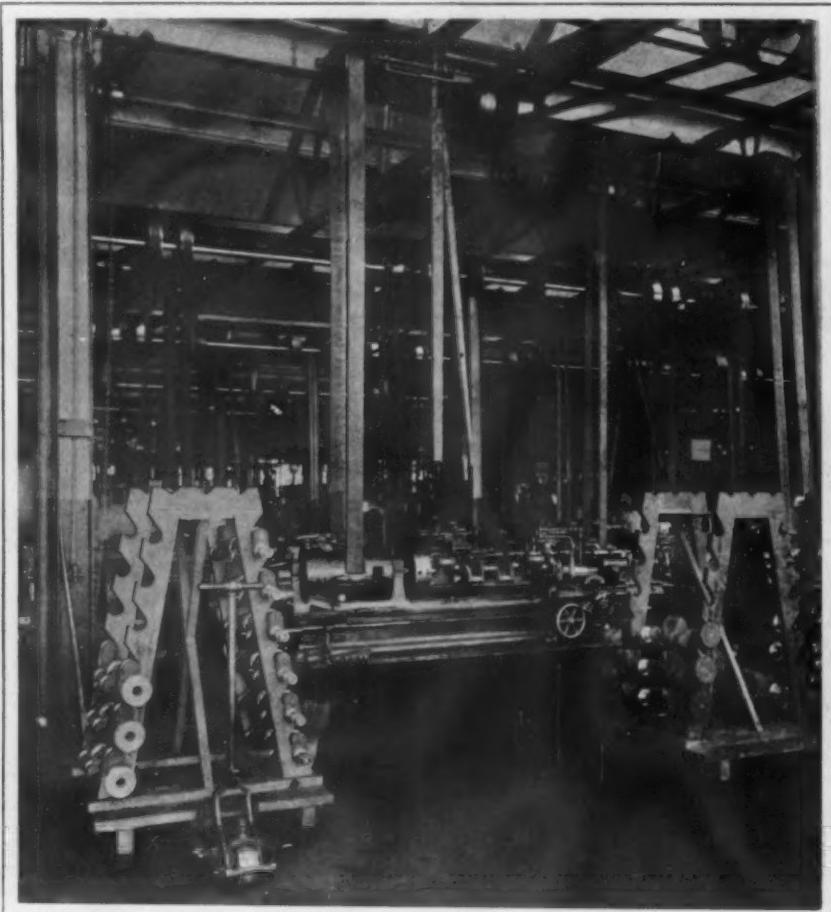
Platforms with Racks, One for Rough Cranks and Other for the Machined Cranks
